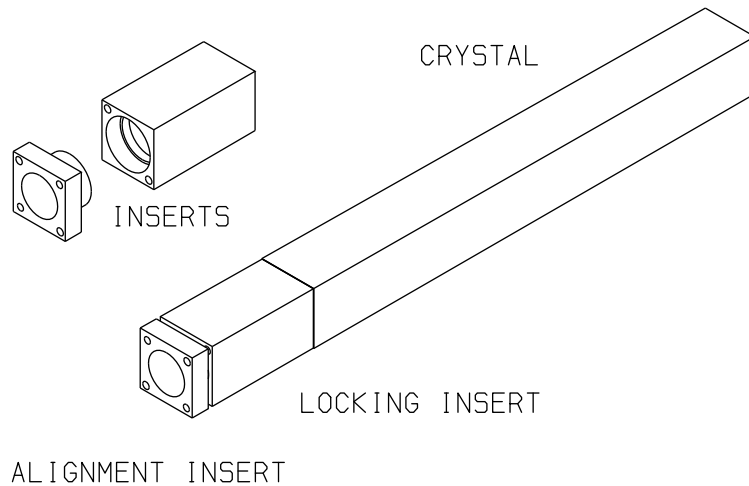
The locking and alignment inserts for the supercrystal.
